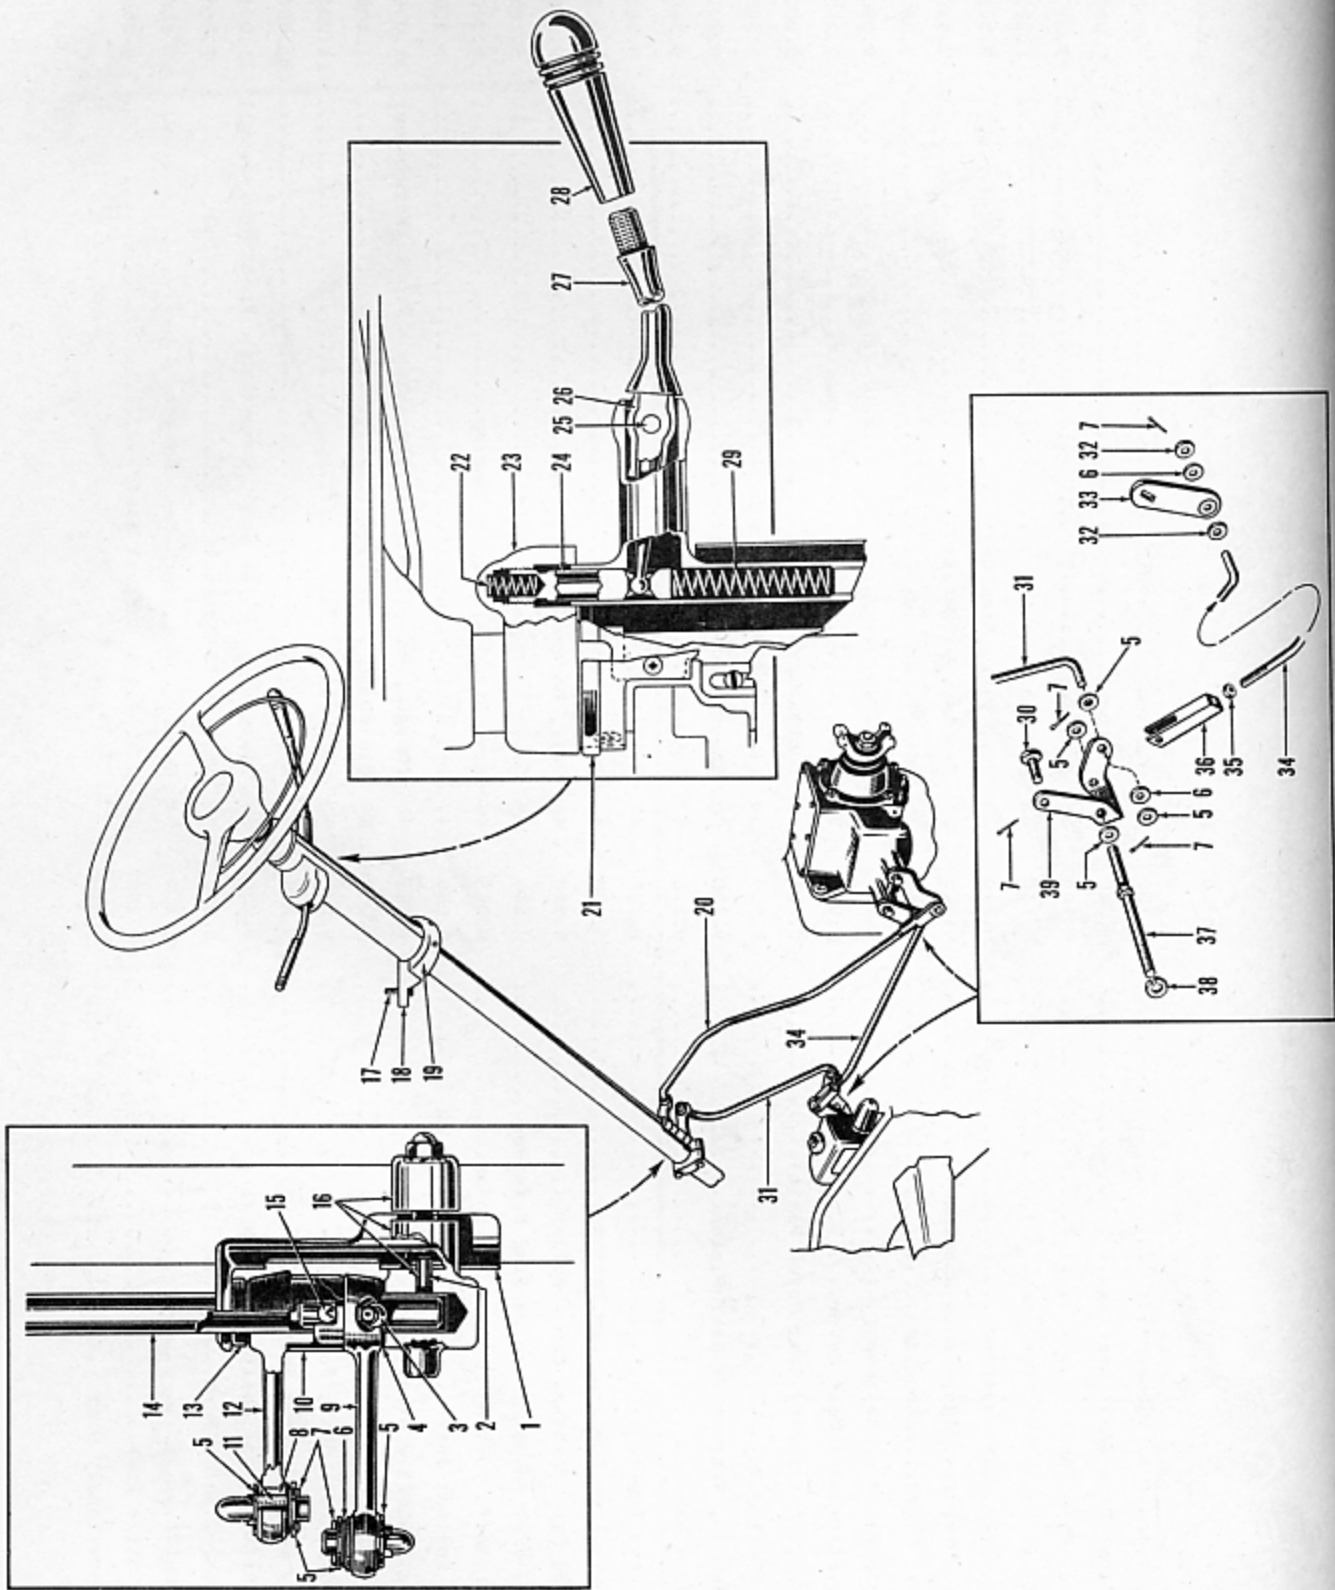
TYPICAL TRANSMISSION GEAR SHIFT CONTROL - CROSS SECTIONAL AND EXPLODED VIEW
